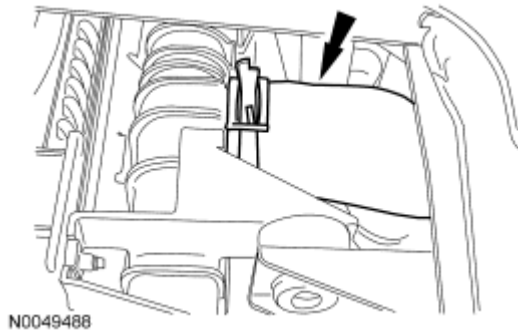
Disconnecting Lower Radiator Hose From Radiator
